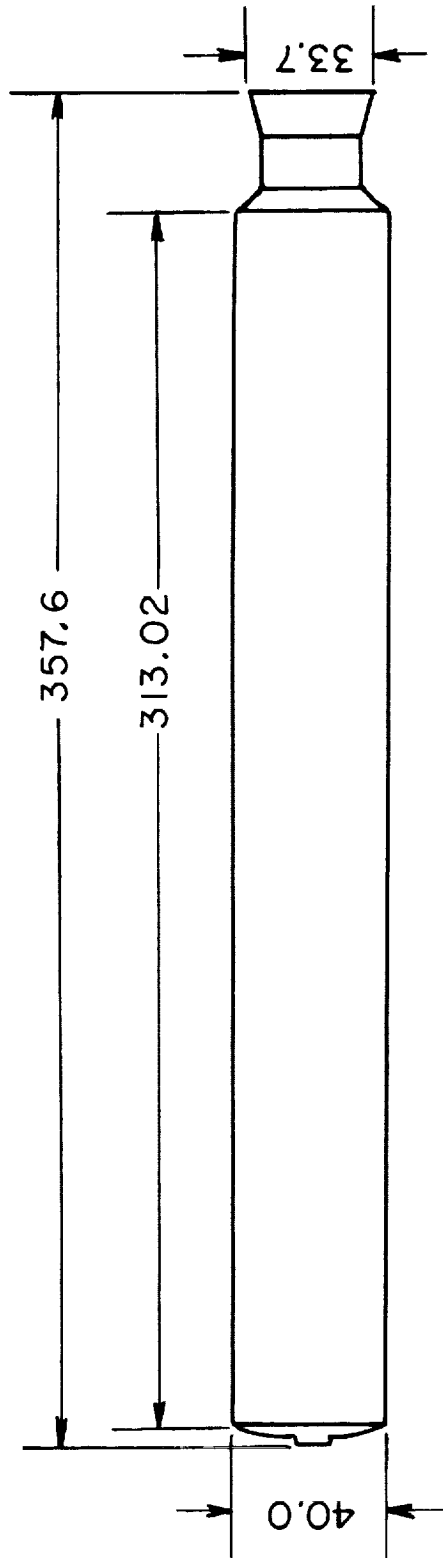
External view of Algol rocket motor. All dimensions are in inches.
